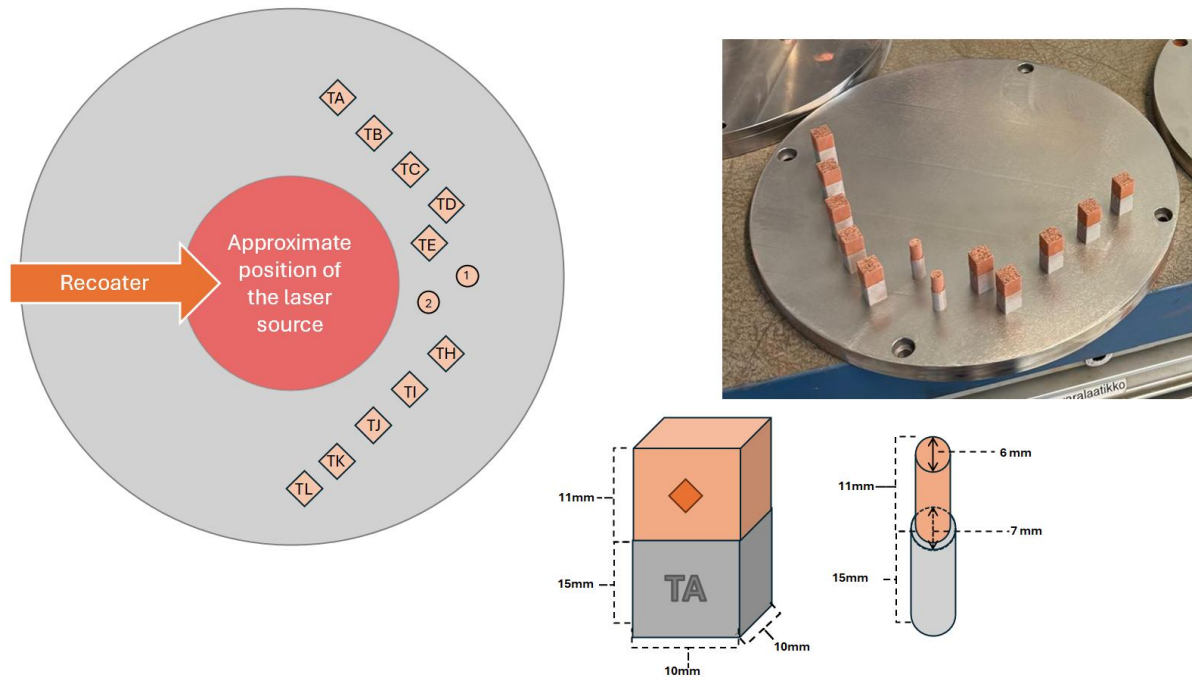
Layout and dimensions of the 316L-CuCrZr parts AMed for the material testing.
